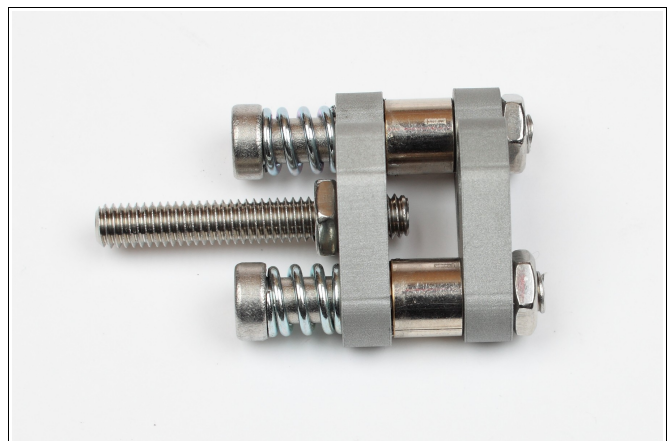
The magnet plate is tightened, until the springs blockade.
